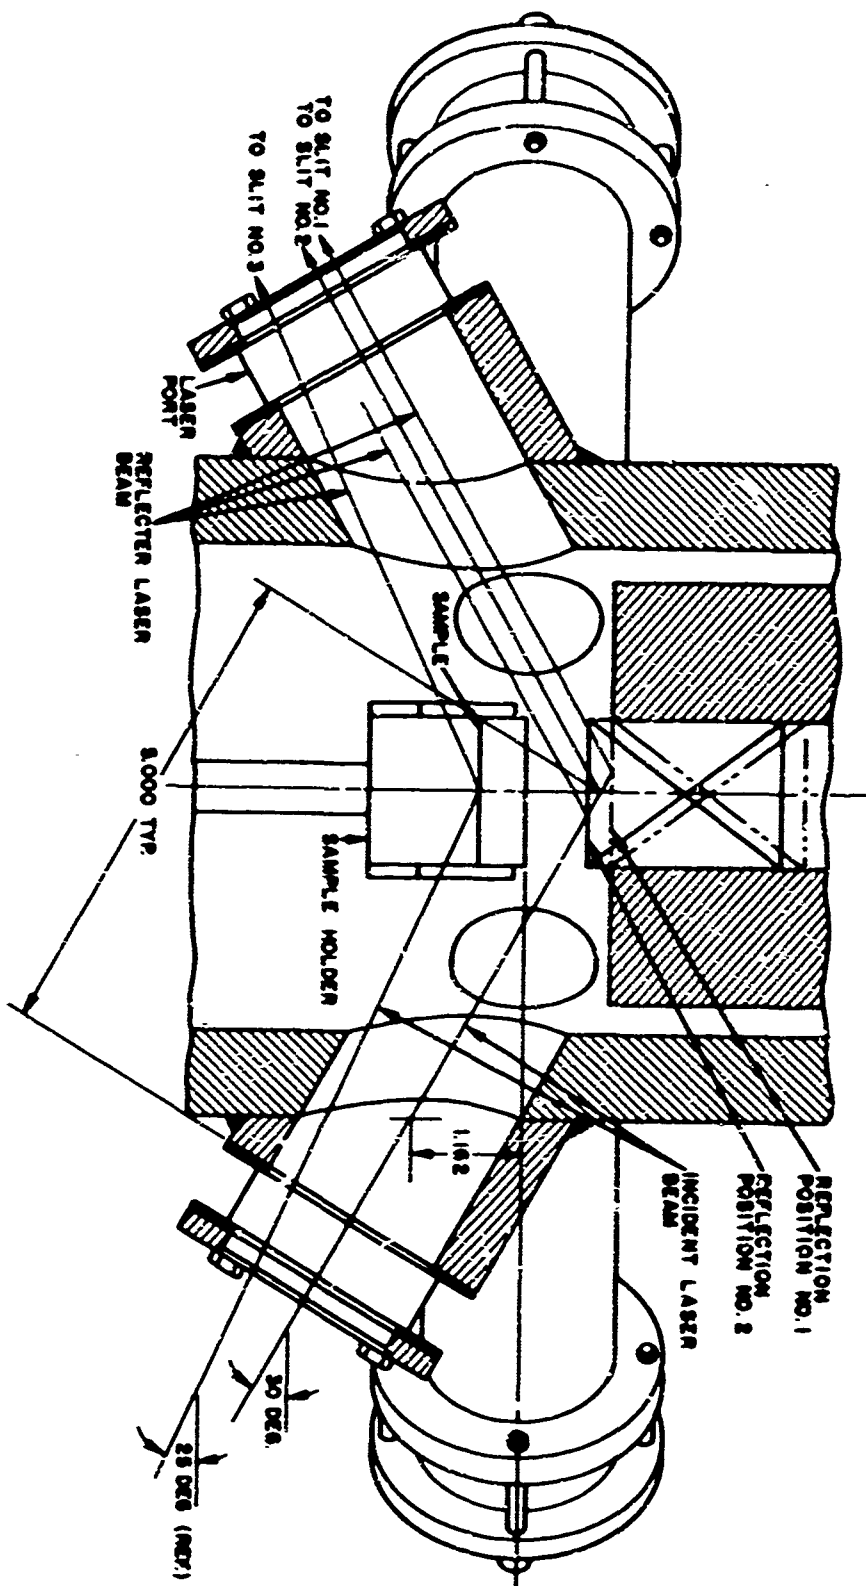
Grueneisen Parameter Tank Assembly - Horizontal Plane
